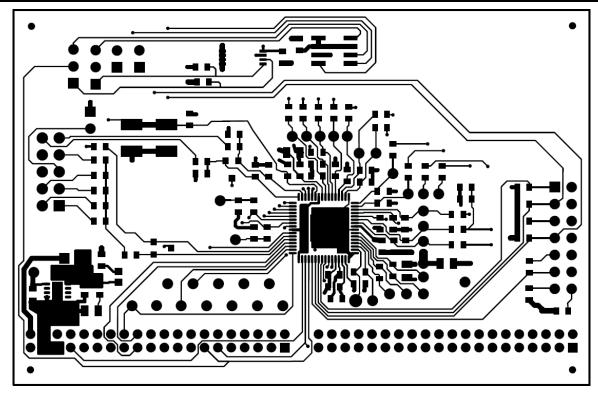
UCD3138064EVM-166 Top Copper (top view)
